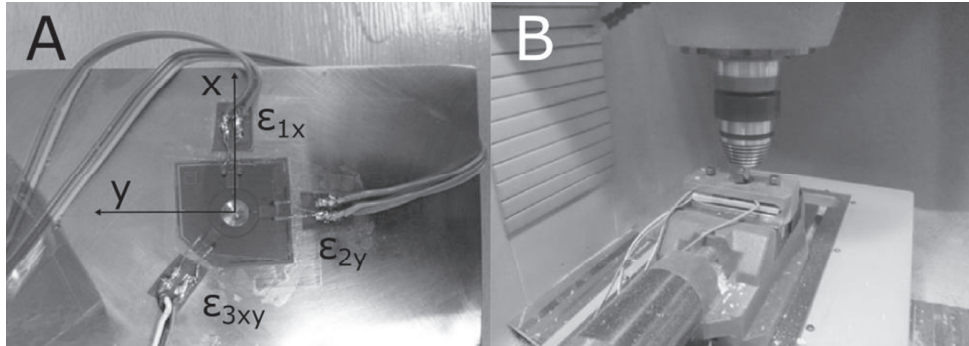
A) 1-RY21-3/120 strain gage rosette set up on a ball-burnished specimen. B) Fixation of specimen on Odisea CNC with controller Fagor 8055 for incremental hole drilling
